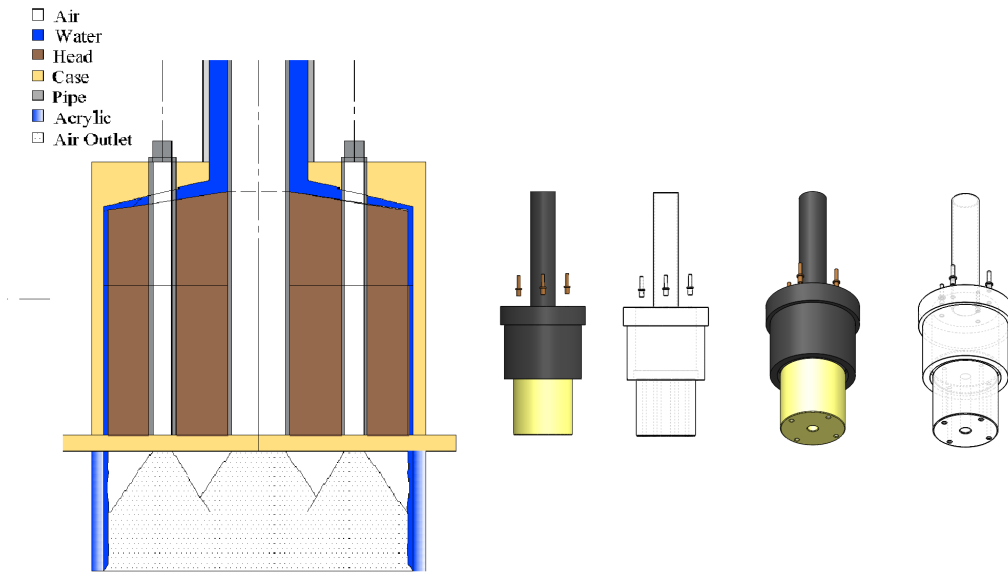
DHSG* injection head, from left to right and from top to bottom: Cut plane and isometric views. Dimensions of the *DHSG* head with water and air injectors, cut plane view. Hydraulic injection head design, annular geometry at the head outlet, inverted cone geometry and compensated inclined plate. The pipe of greater diameter (chamber) is not included in the figures.
